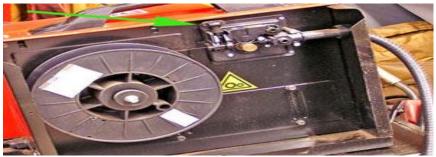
Gas metal arc welding wire feeder system
